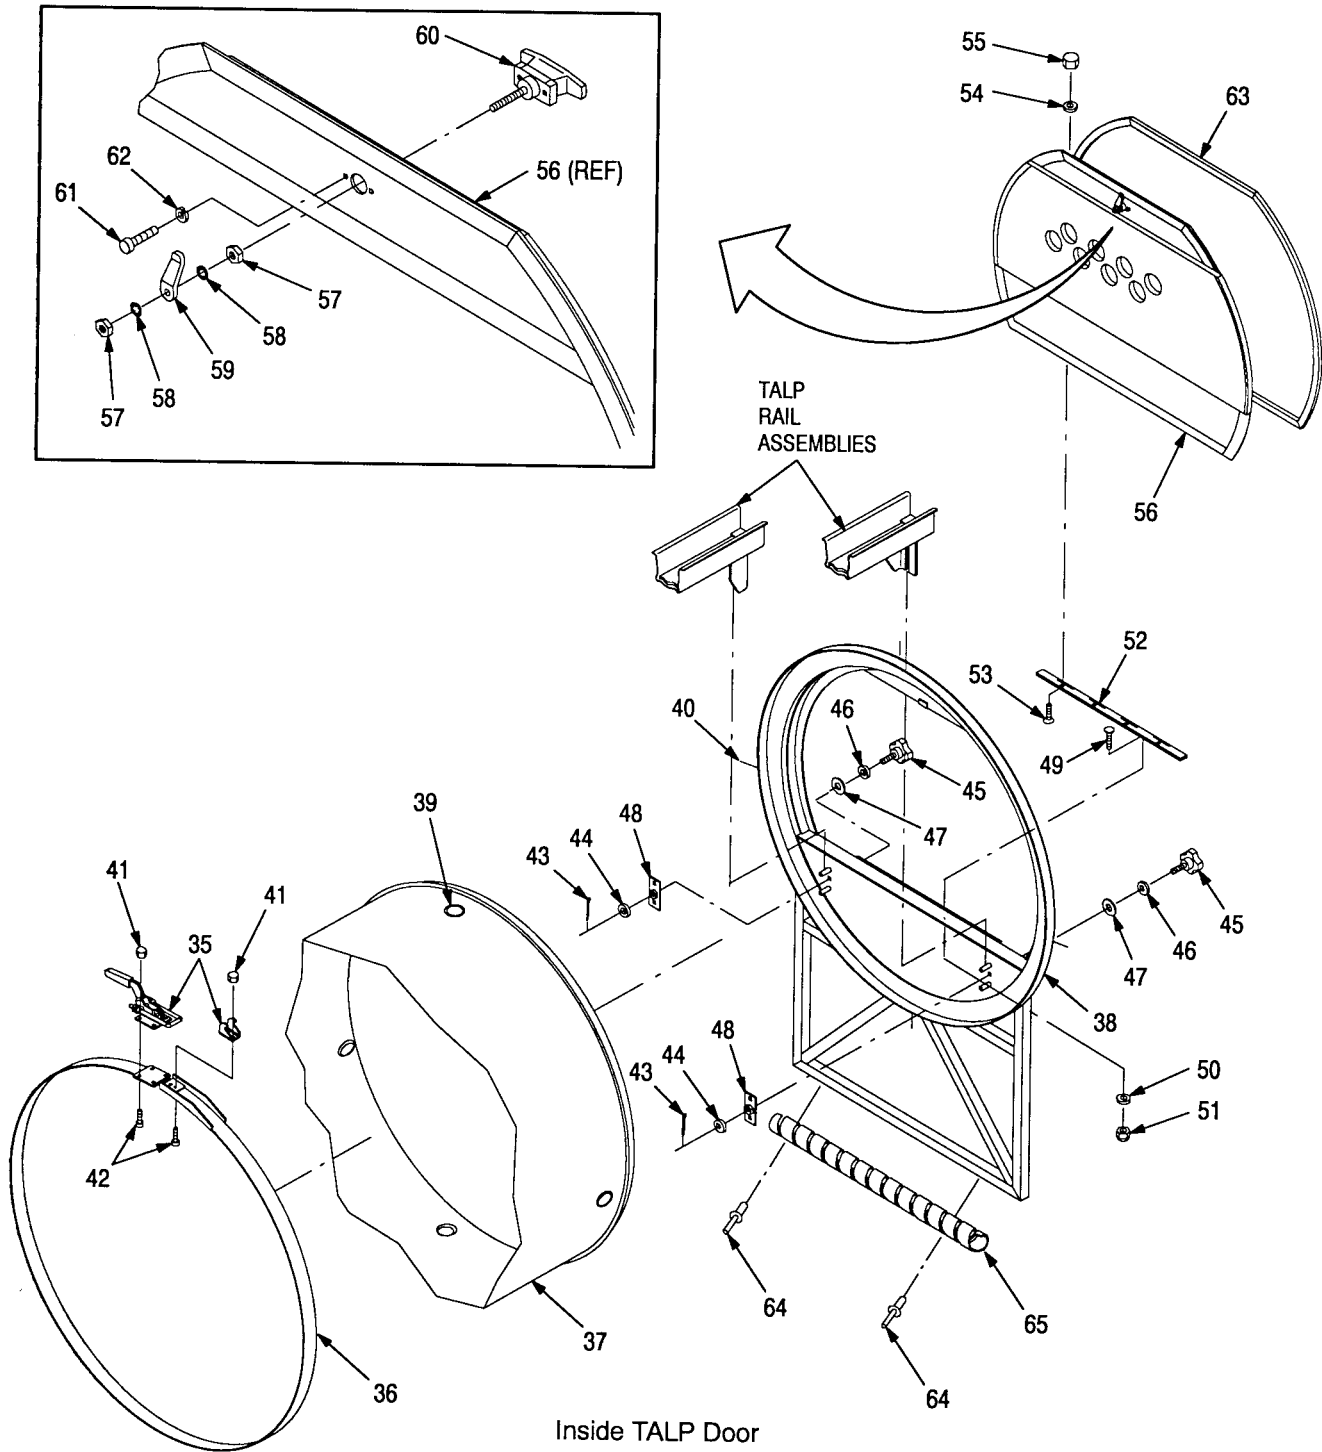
TALP Airlock Door Assembly Repair (Sheet 1 of 2)
